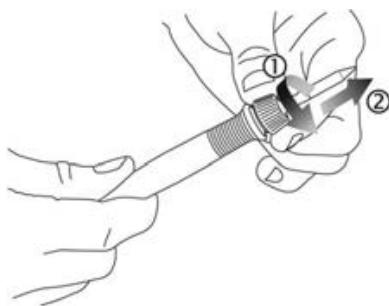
Unlock [1] and pull out [2] the soldering tip
